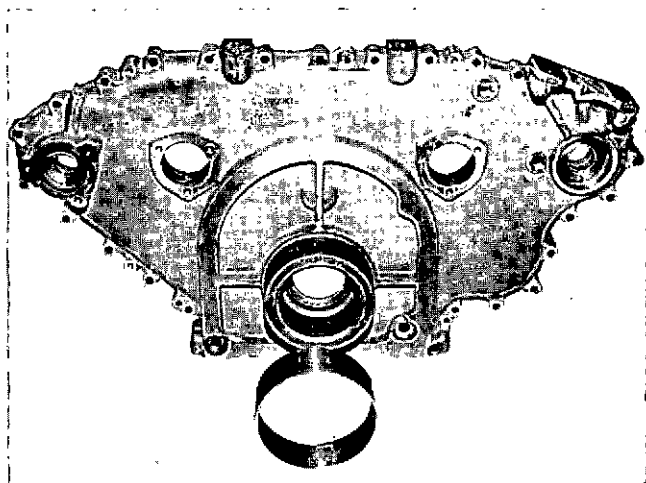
, V40151. Gear case cover and trunnion bushing
